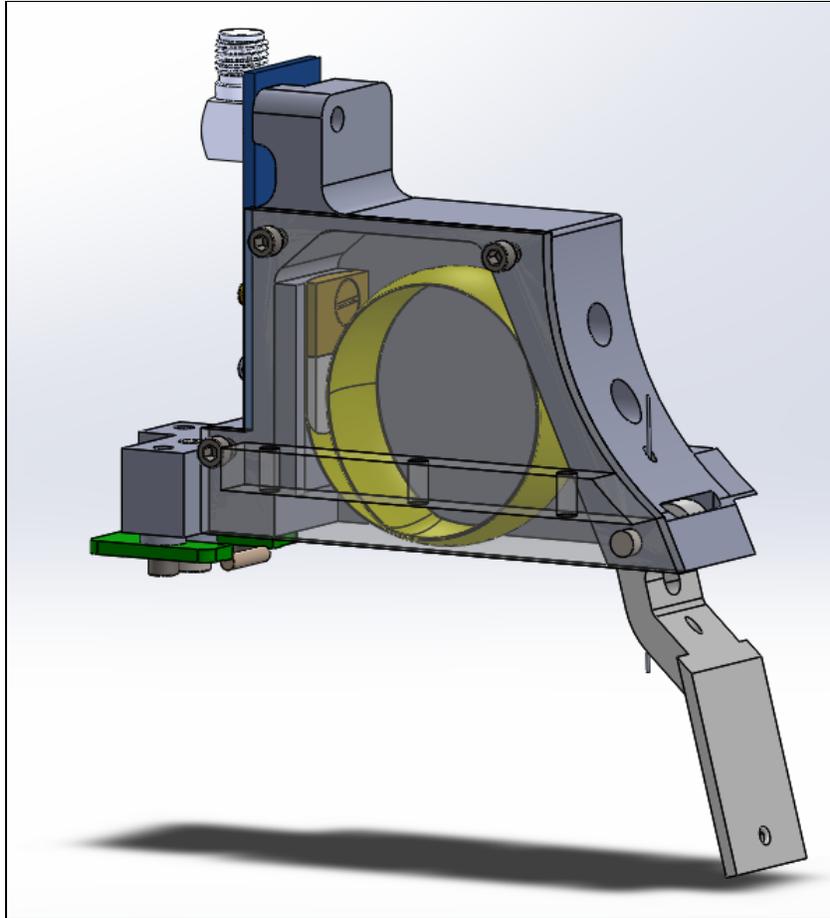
Updated UHF Antenna Housing CAD - Stowed Assembly.
